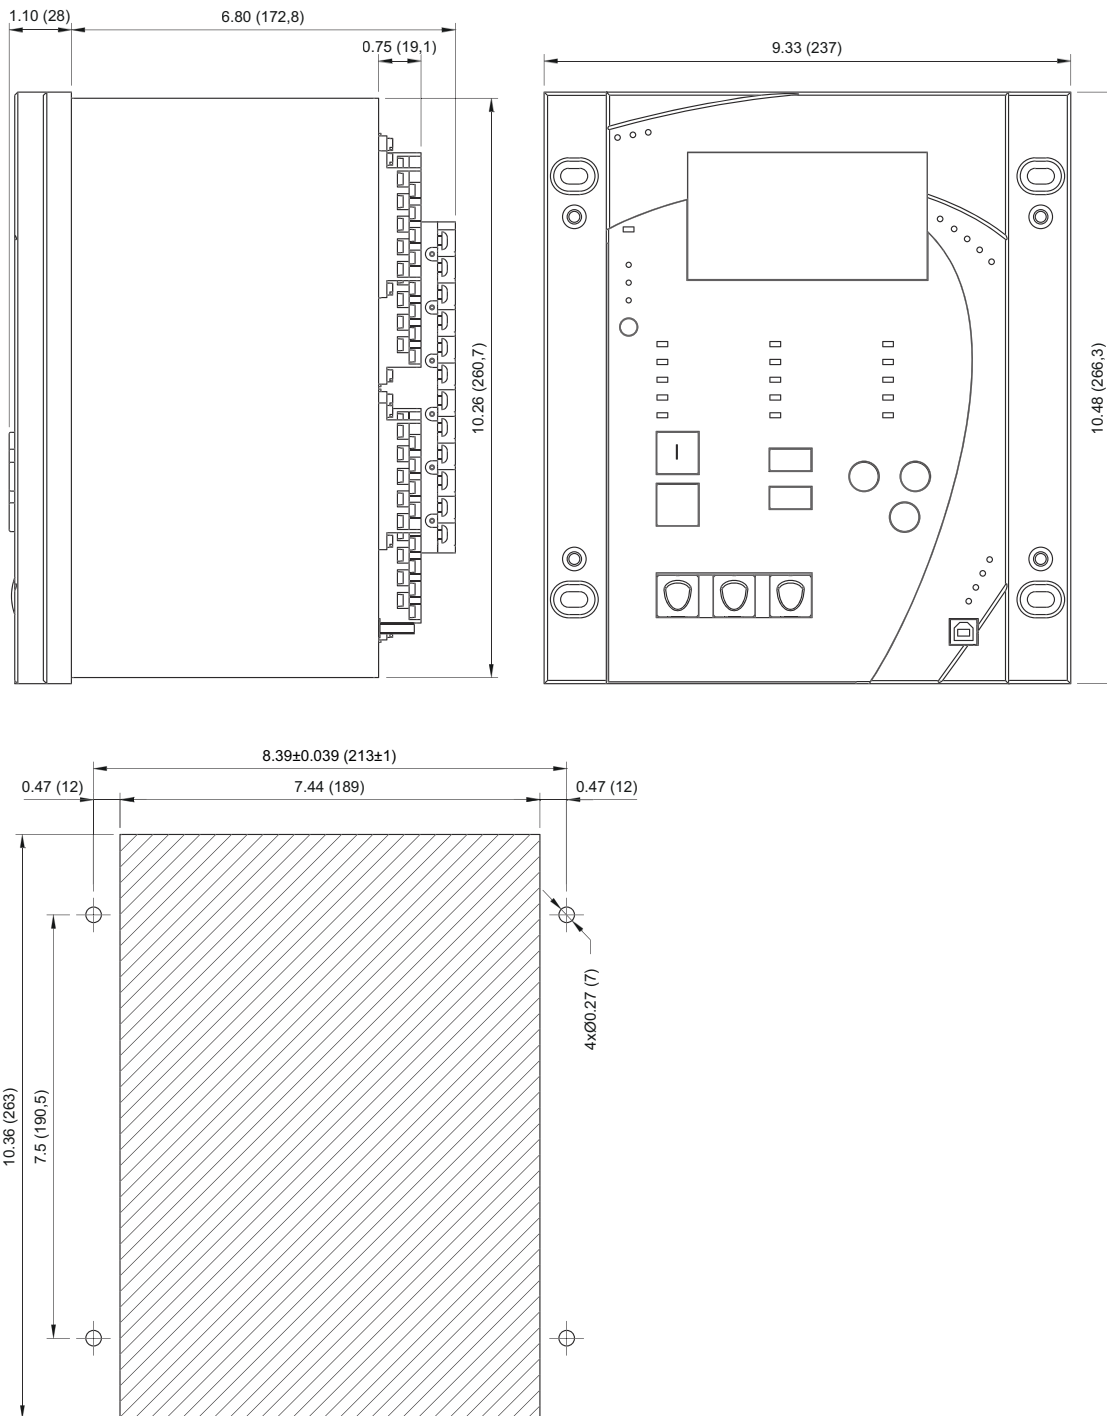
Drilling dimensions for 1/2 rack relay (B2216H03)
